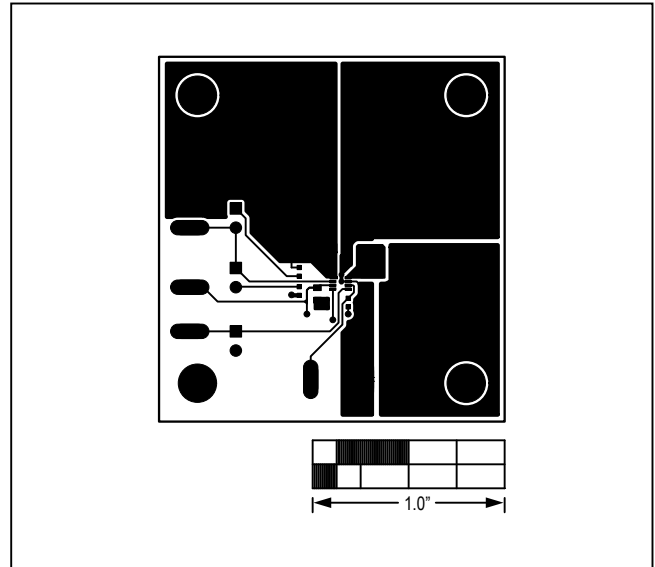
MAX15462A EV Kit PCB Layout—Component Side
